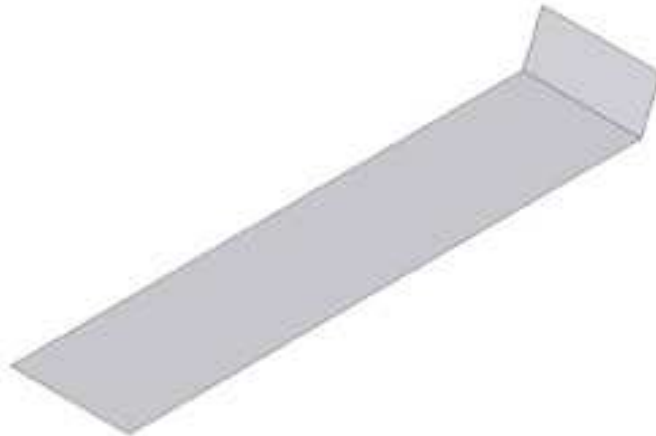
Electrode/Comb to transfer the delivered charge from the belt to the HV terminal, VDG dome. Dimensions are shown on technical drawings and given in appendix B with Part number 9
